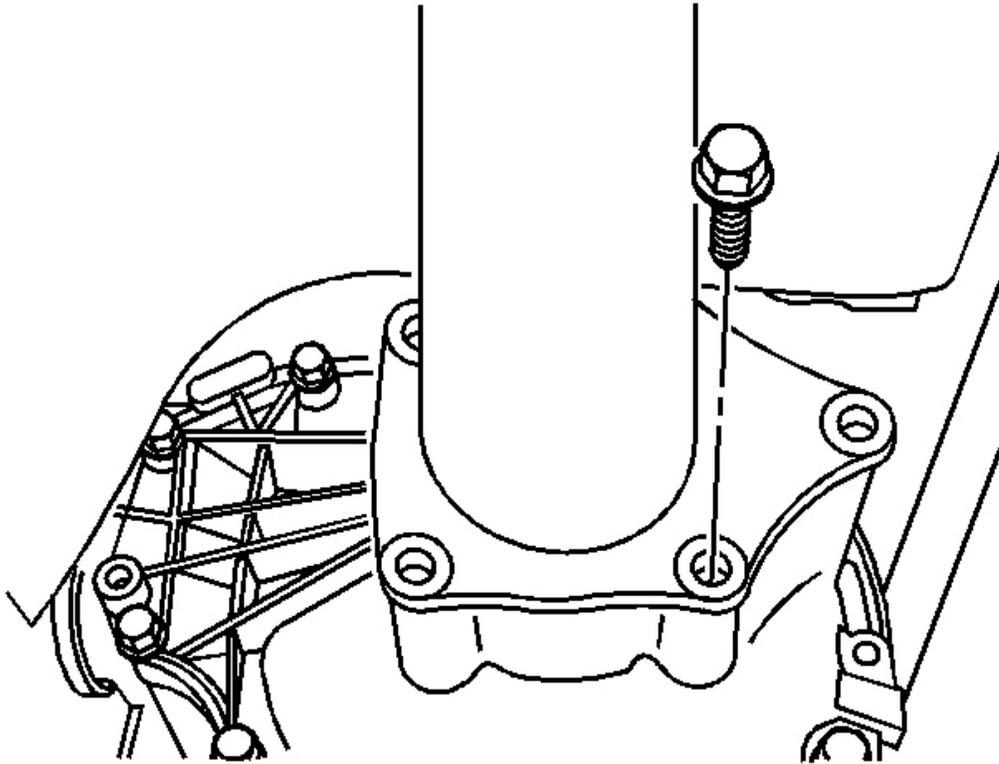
Front Drive Inner Axle Shaft Housing Bolts
